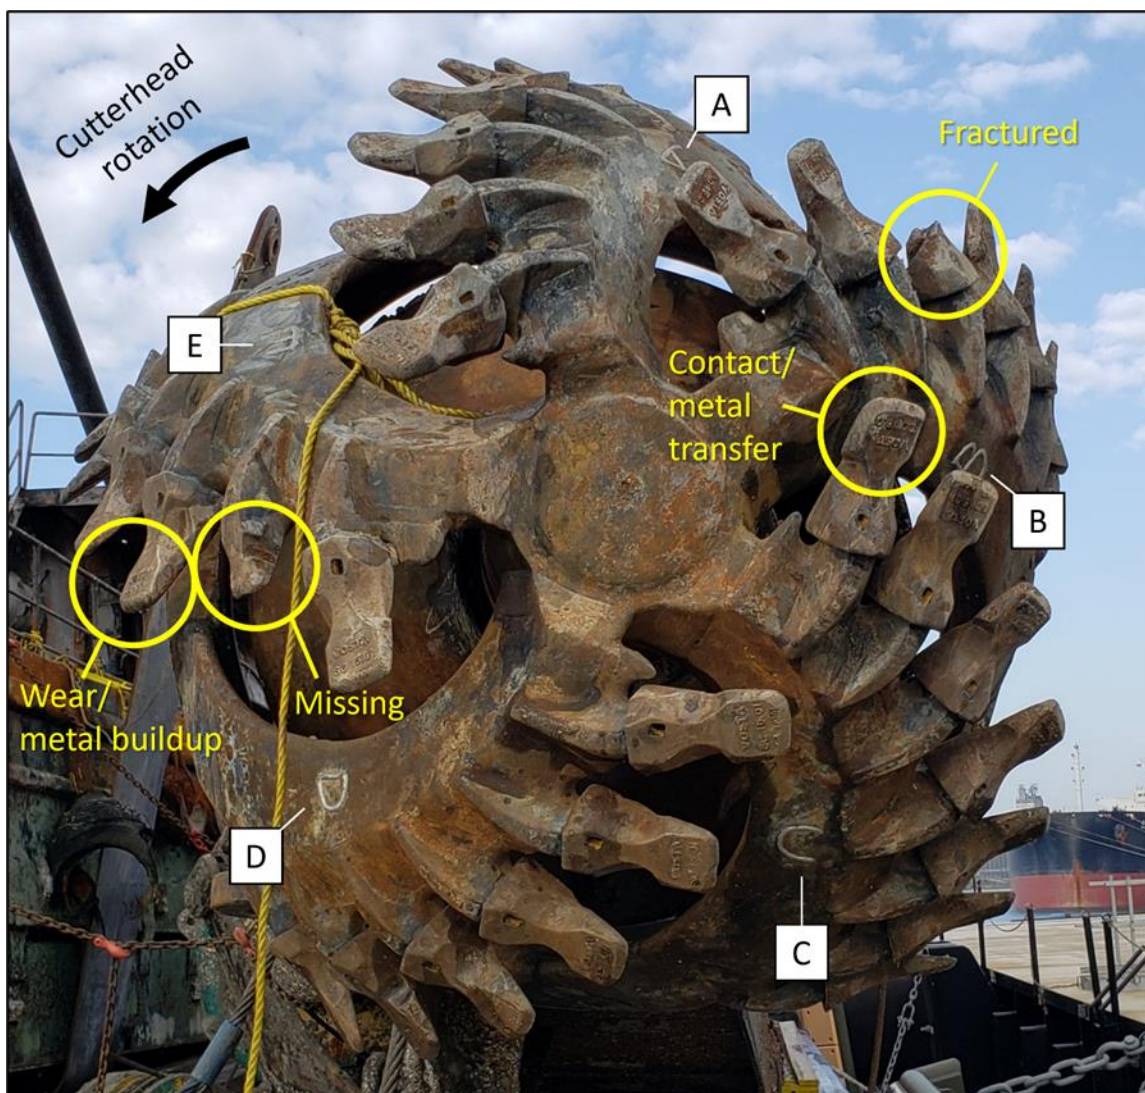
Front view of cutterhead assembly after underwater recovery (looking aft).
